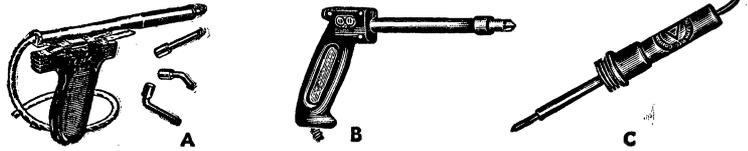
AND 125 WATT "GUN GRIP" SOLDERING IRONS
